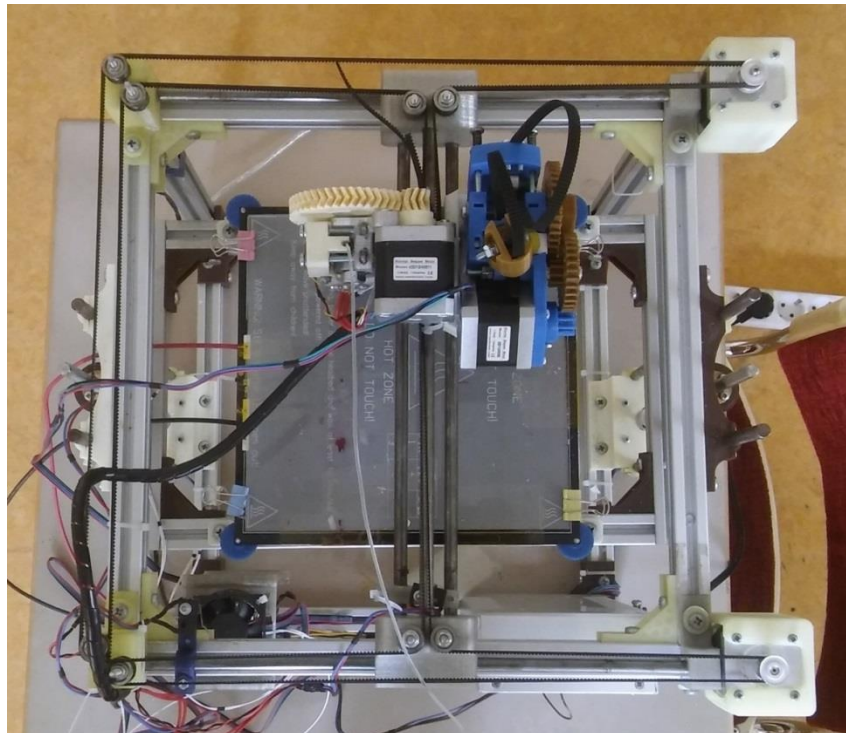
Extruder carriage designed to move according to CoreXY principle.
